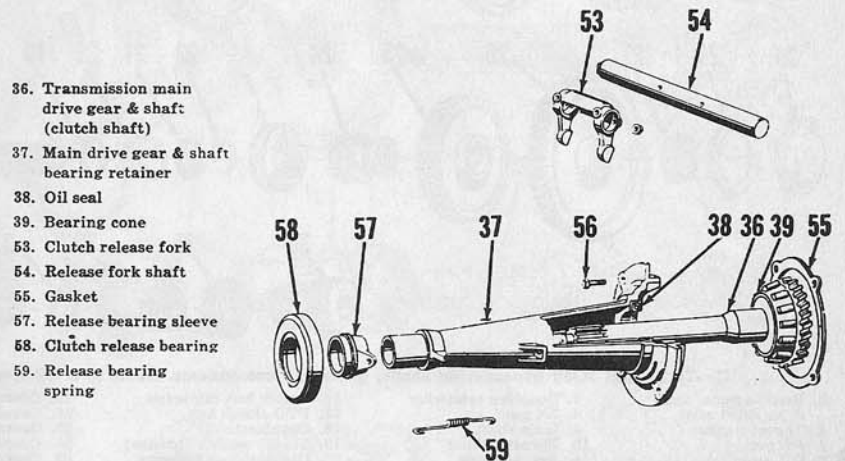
Models TO20, and TO30 main drive gear and shaft (clutch shaft). Overhaul of this shaft and components requires detaching transmission from engine. TE20 is similar.
